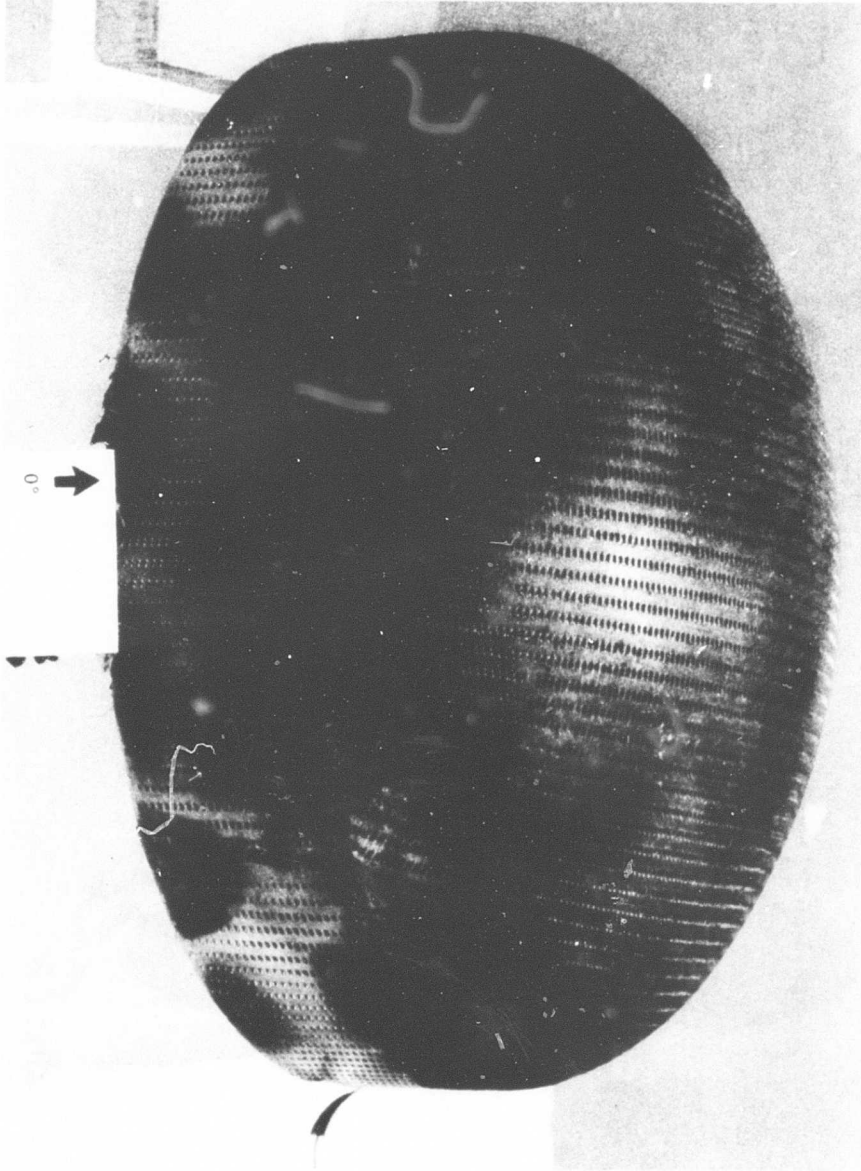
Post-Test Photograph of Hot Side of Transpirationally Cooled, Dome Shaped, Inner Liner After 28:50 Hours of Hot Testing.
